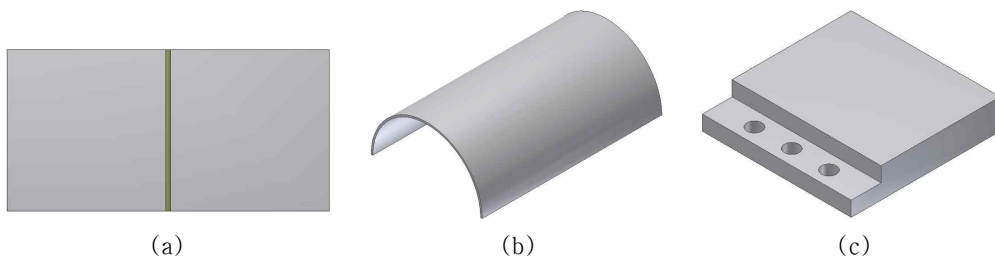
Stainless steels for magnetic permeability measurements: (a) welded (b) cold formed, and (c) machined samples.
